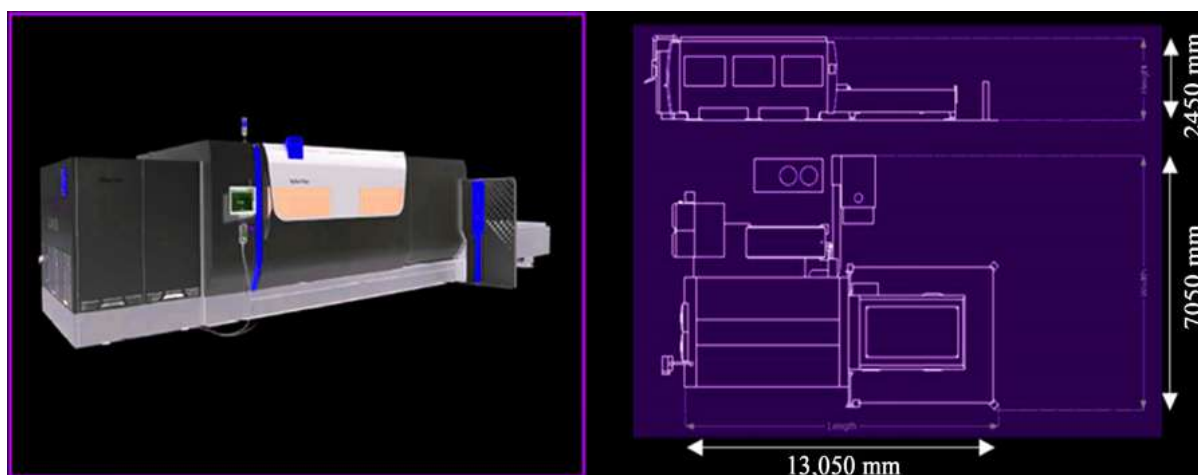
A flat-bed CNC machine for laser cutting in two dimensions (BySprint Pro 4020) (Livesey, 2018)
